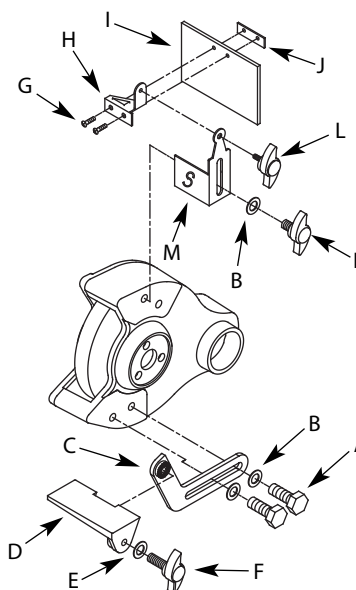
Grinder Tool Rest and Eyeshield Assembly
